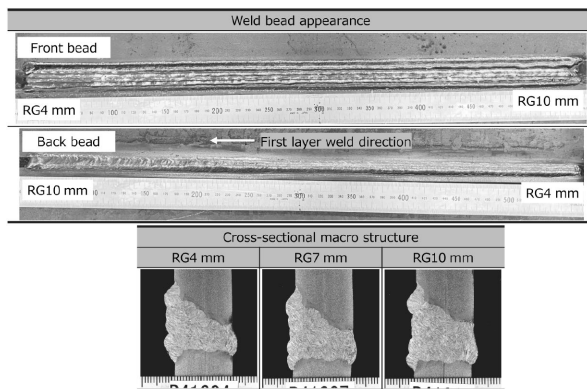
Bead appearance and cross-sectional macro structure in welded joint
